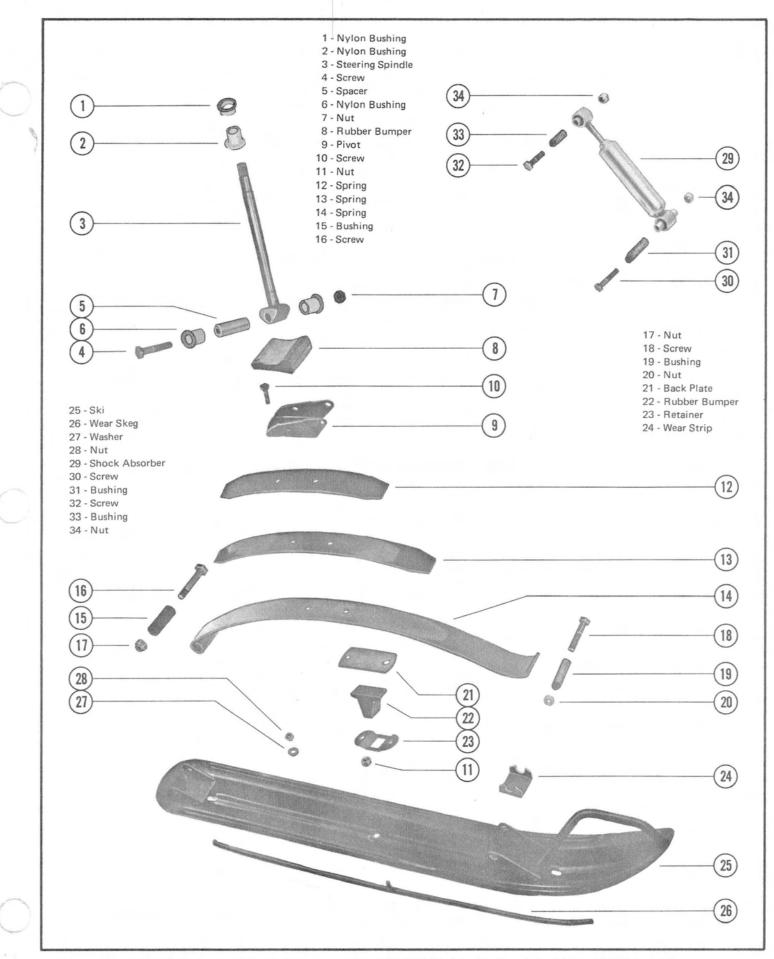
Ski, Spring and Spindle Components for 440 MAX Model with Chassis Serial No. 3447382 and Below
